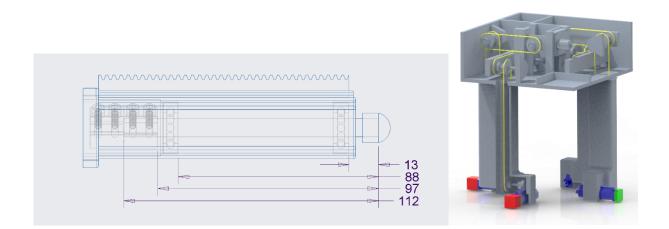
left: Finger drawing (all dimensions in mm) right: Finger and attachment placement (motor - red, backing - green)
